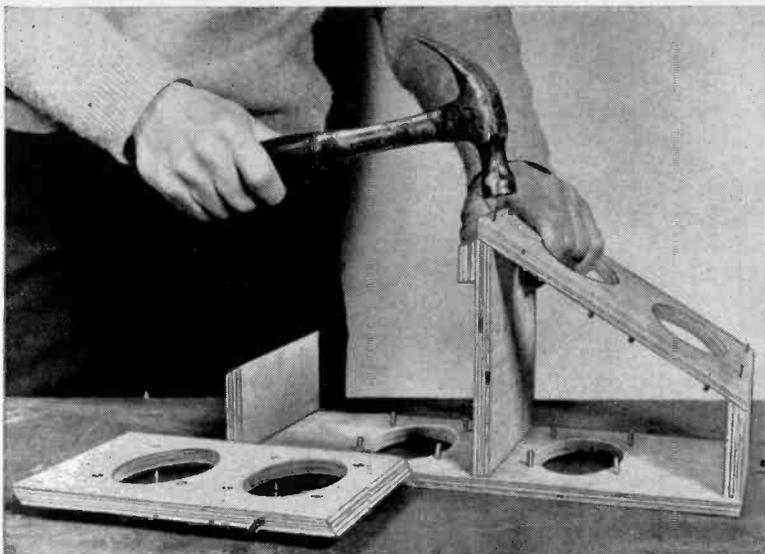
Except for top plate, all parts should be joined using wood glue and finish nails.
